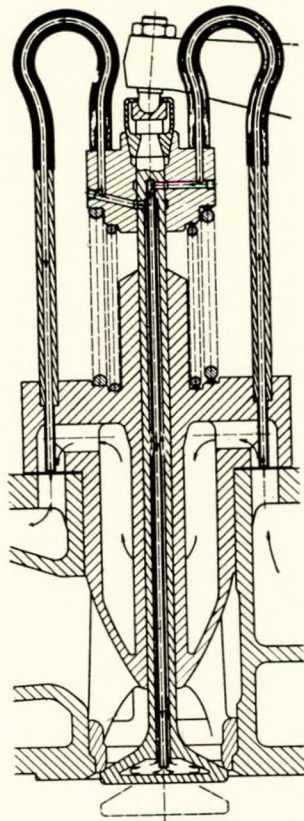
Sketch showing the method adopted for cooling the exhaust valves
